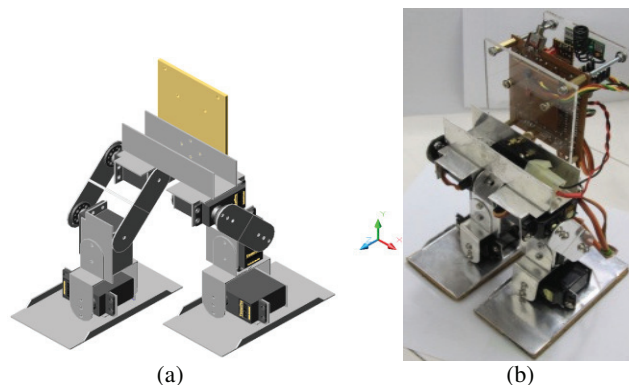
(a). Bipedal robot design outlook and (b). completed mechanical and electronics structure.
